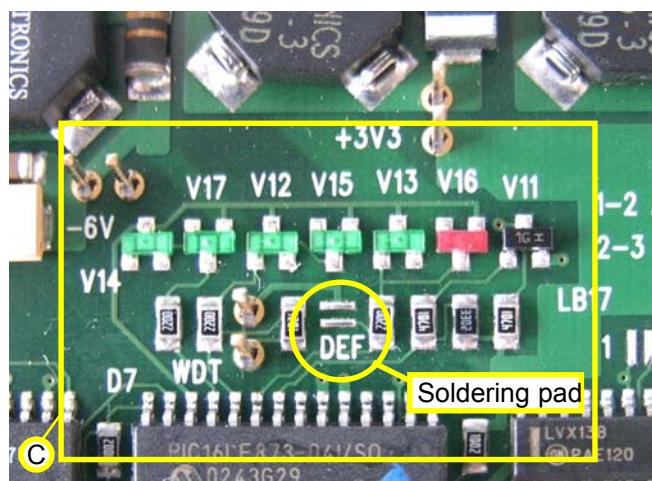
Soldering pad “DEF/LB3” (PCB “DSP01”)
